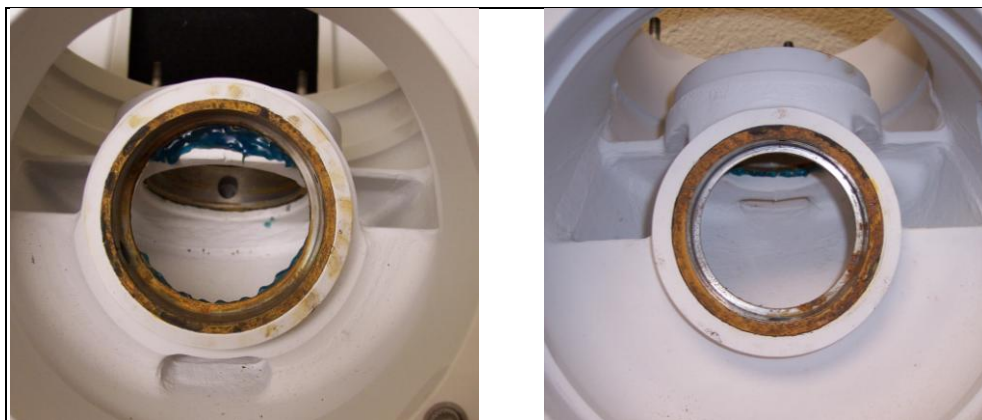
Extensive damage to the steel liners after removal of Acme masking tools. Left: top steel liner. Right: bottom steel liner.
